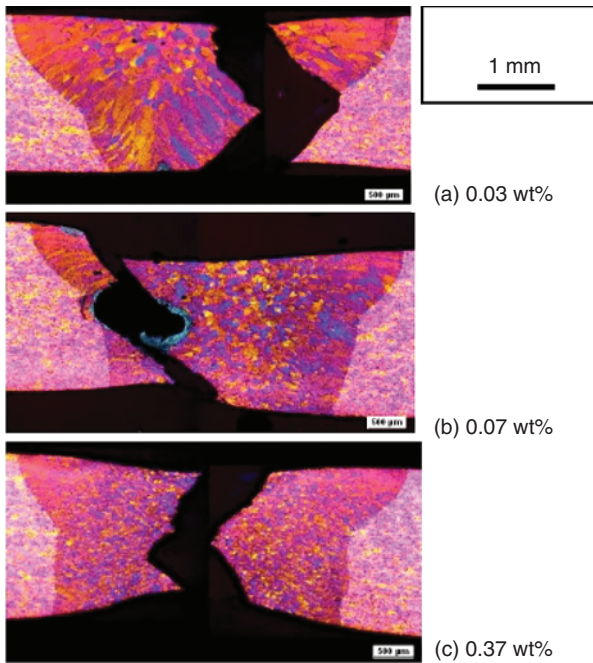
Metallographic images of the failed tensile specimens from the weld cross sections of three AA6082Al alloys with three different Ti content welded by laser welding [74]/DVS Media GmbH.
